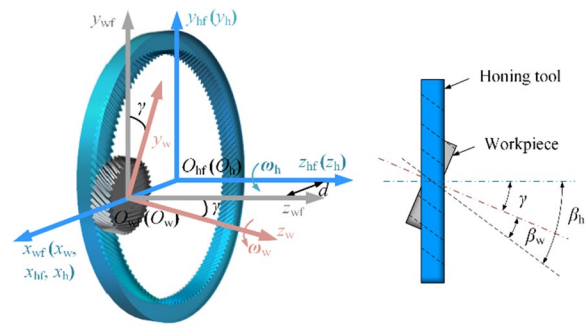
Spatial coordinate systems of workpiece and honing tool and schematic of the contact between workpiece and honing tool
